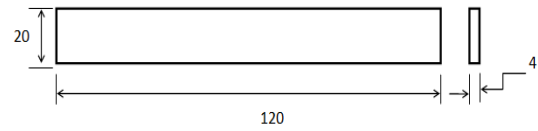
The schematic diagram of test specimens (Unit: mm)
